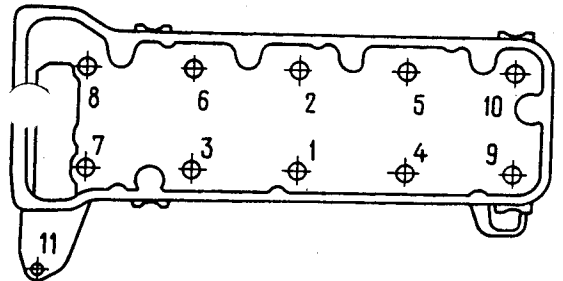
Sequence of Tightening Cylinder Head Bolt
